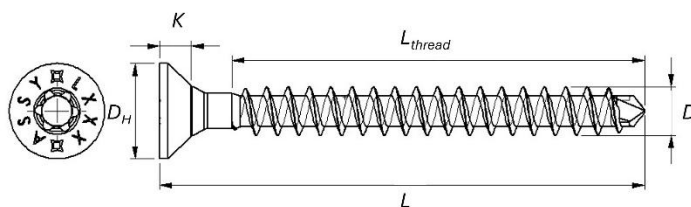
ASSYplus VG 4 SCREW WITH COUNTERSUNK HEAD (CS)
